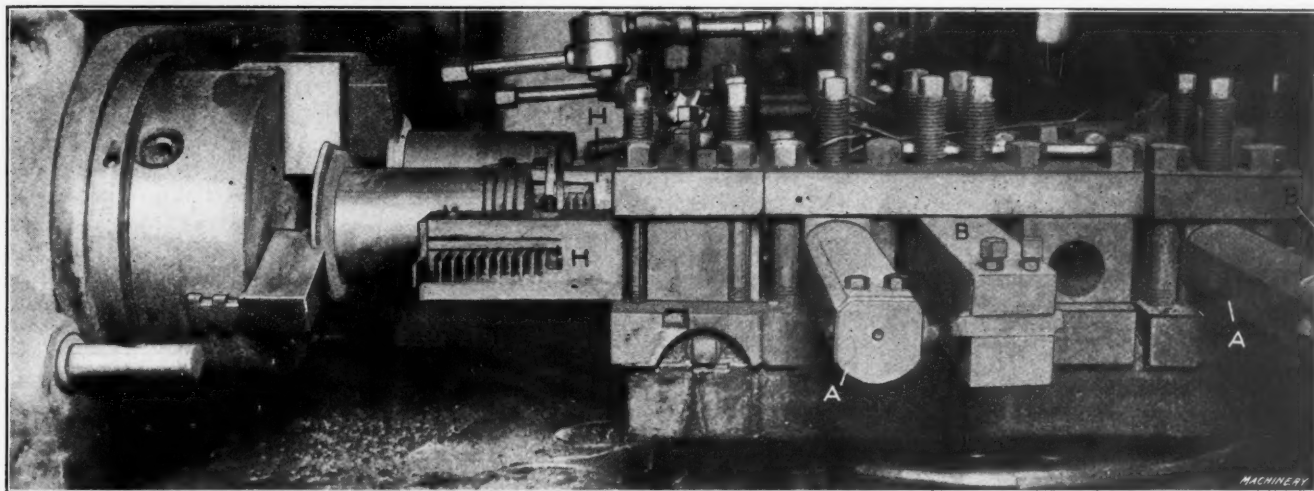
Close View of Machine shown in Fig. 5, showing the Cutting-off Tools at Work cutting off the Piston Rings
